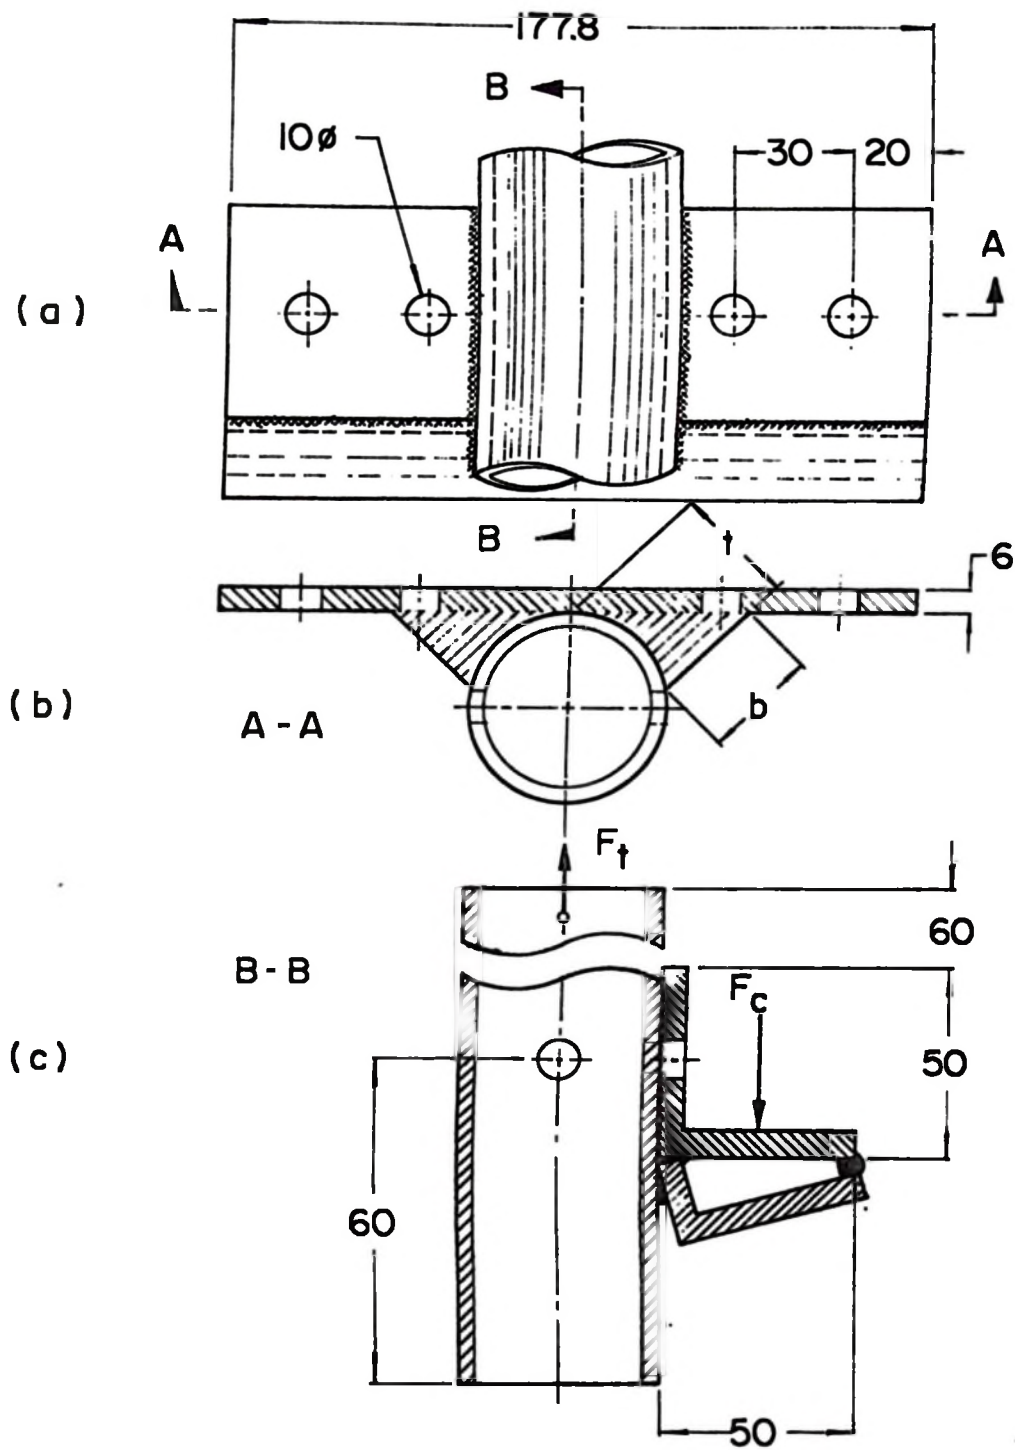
Assembly of the bracket for the thresher stand and forces acting up on.
